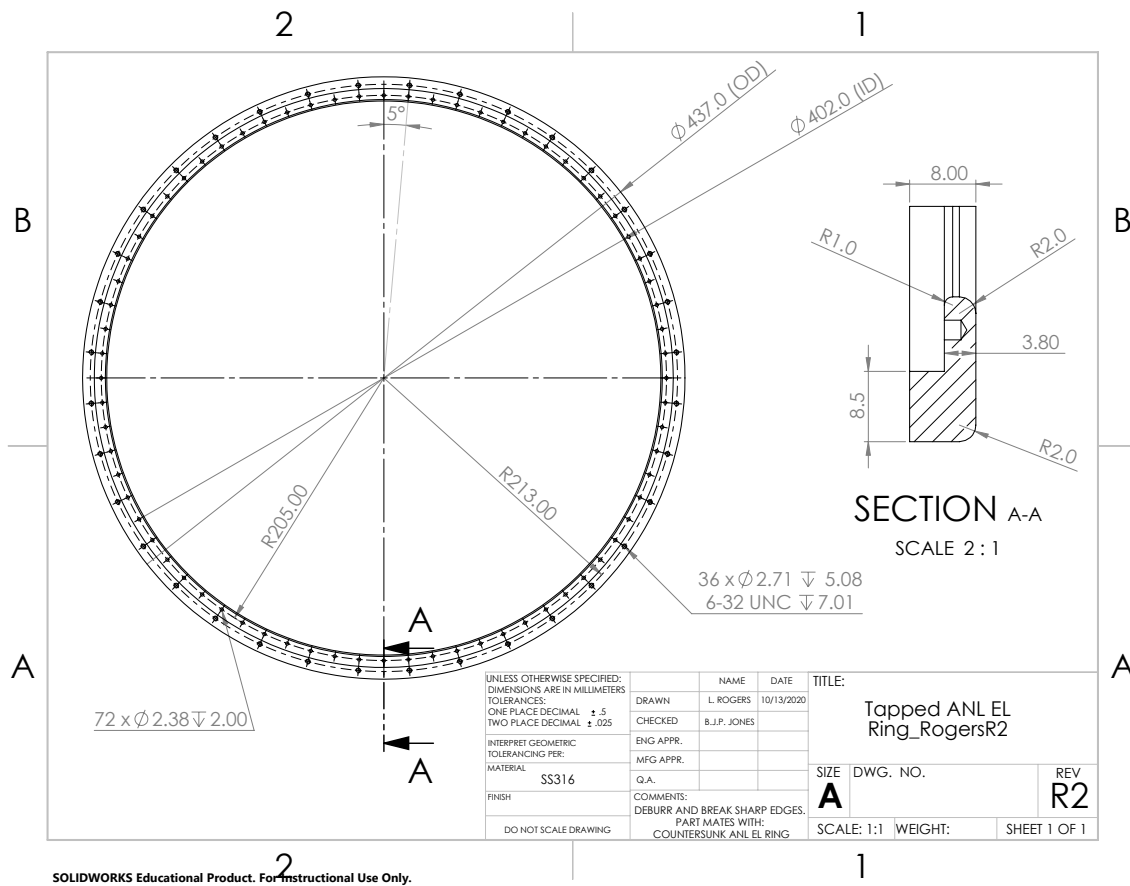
Machine drawing for manufacturing the EL Base rings.
